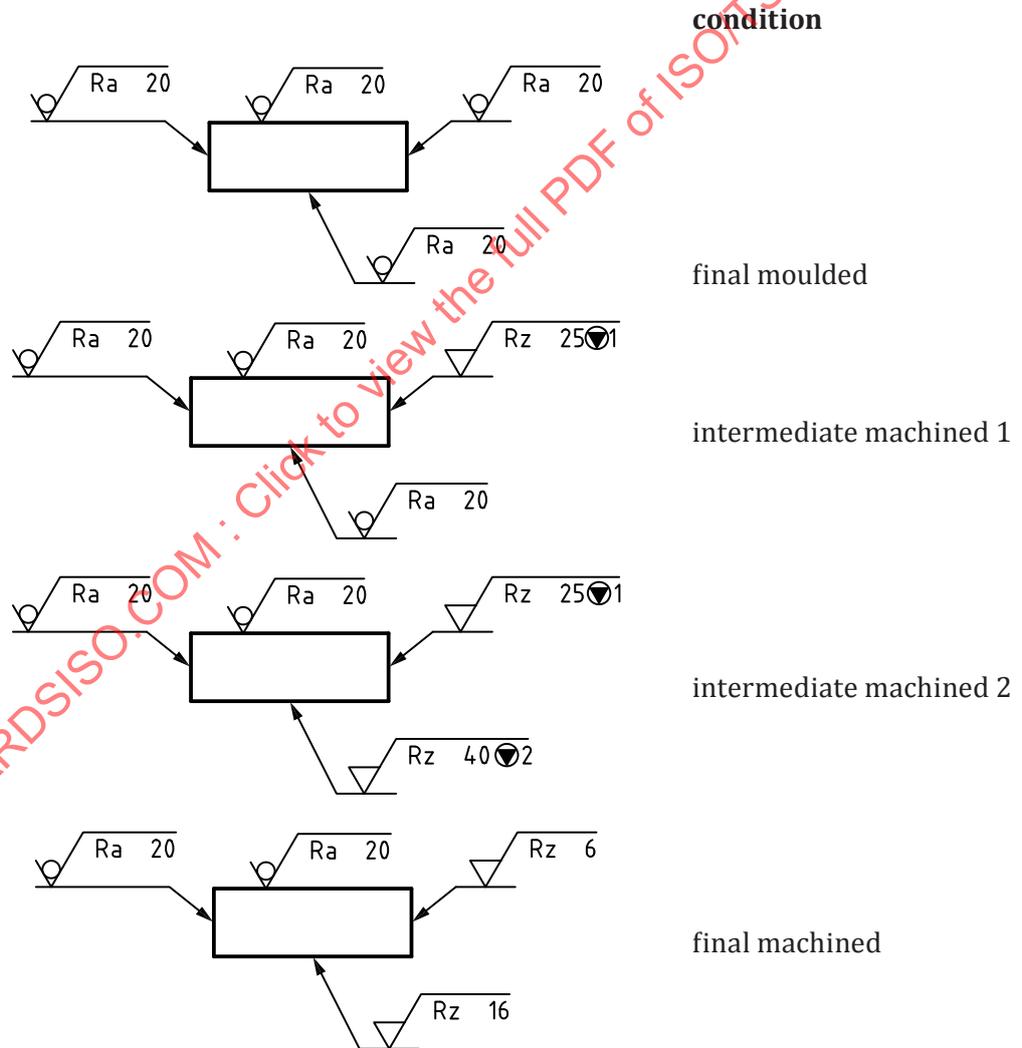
Example of a surface texture indication on a combined drawing and its interpretation
